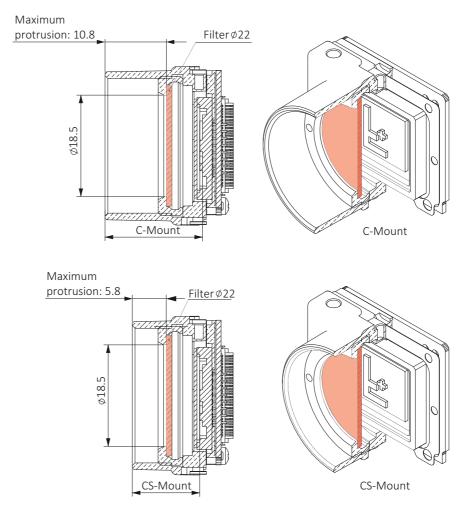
C-Mount and CS-Mount dimensions for Mako G models
